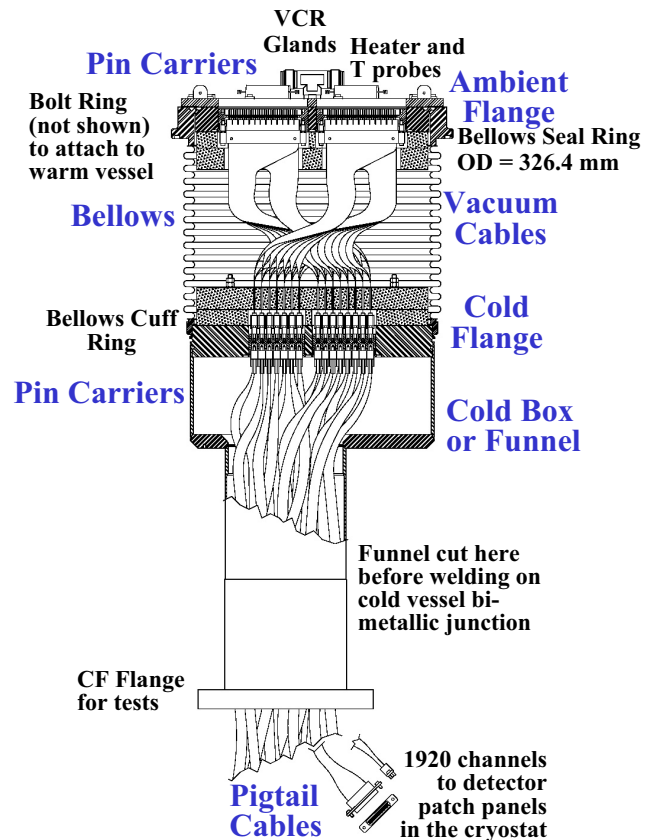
Overview drawing of one endcap signal feedthrough, identifying its most important components.
